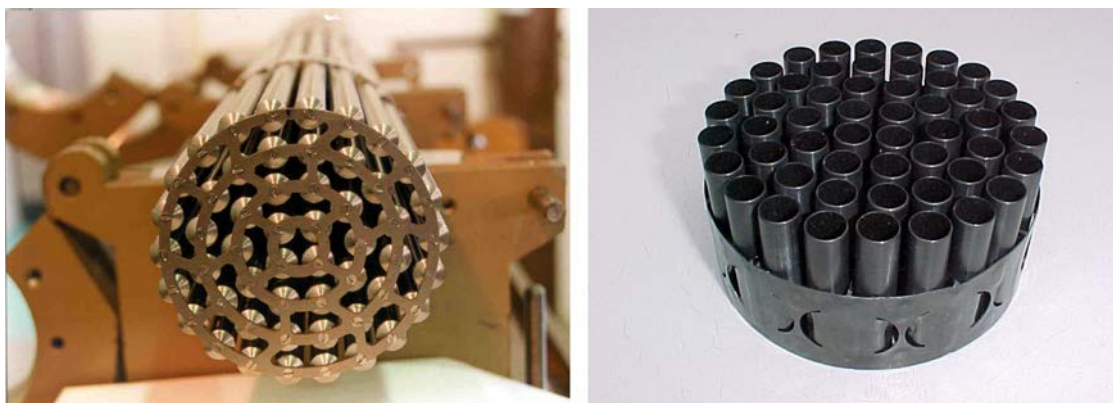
CARA prototype (left) and spacer grid prototype (right) [I-5, I-6].
